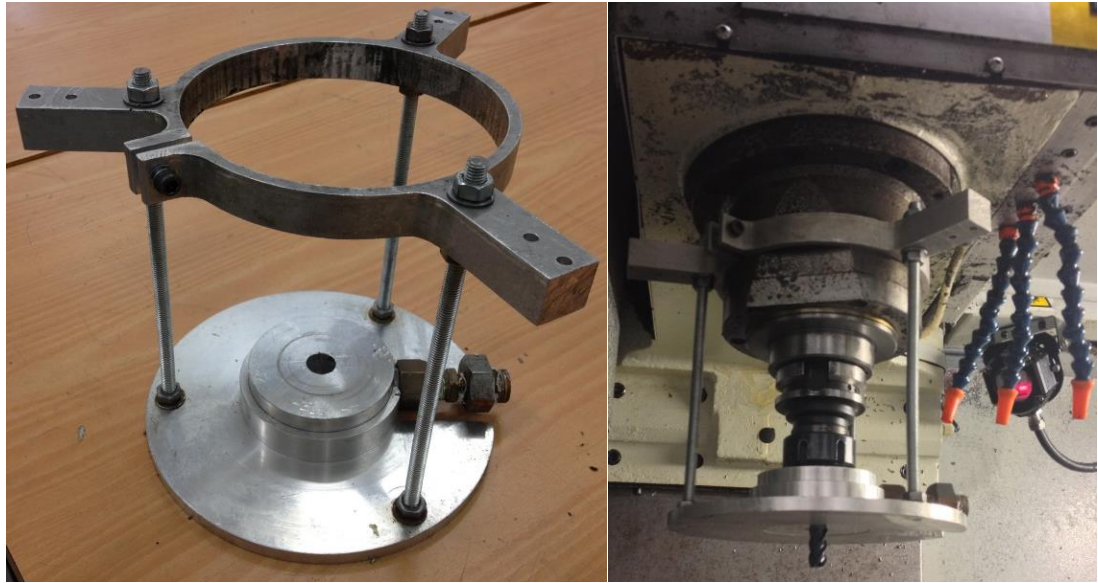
The cryogenic shower nozzle and clamping system prototypes mounted on the Bridgeport VMC 610 XP<sup>2</sup> vertical milling centre
